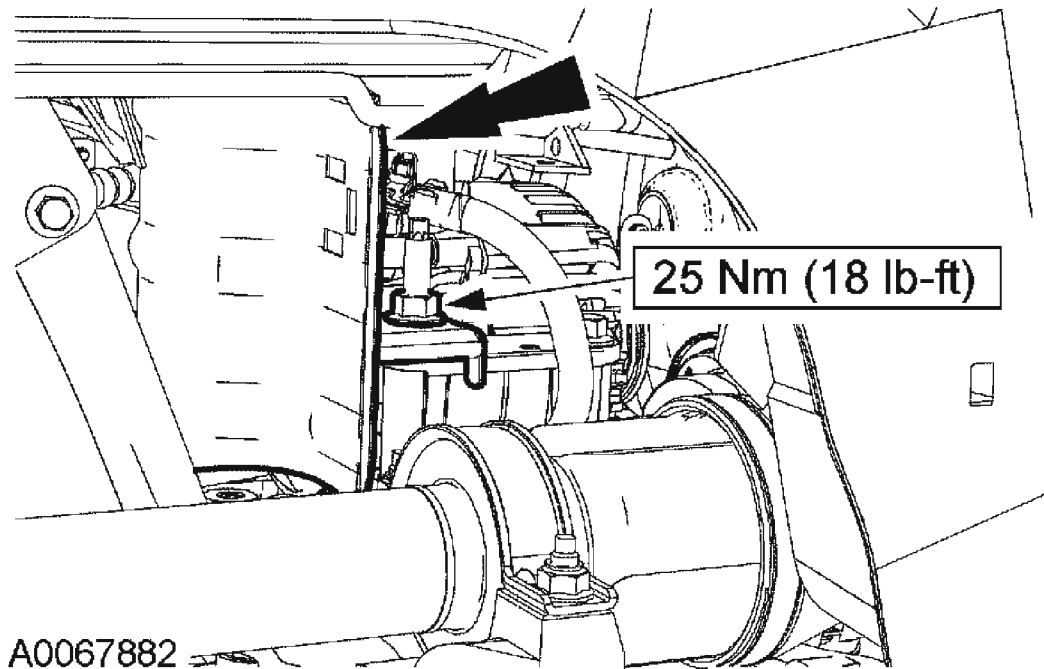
Removing Generator Heat Shield Lower Nut And Heat Shield
